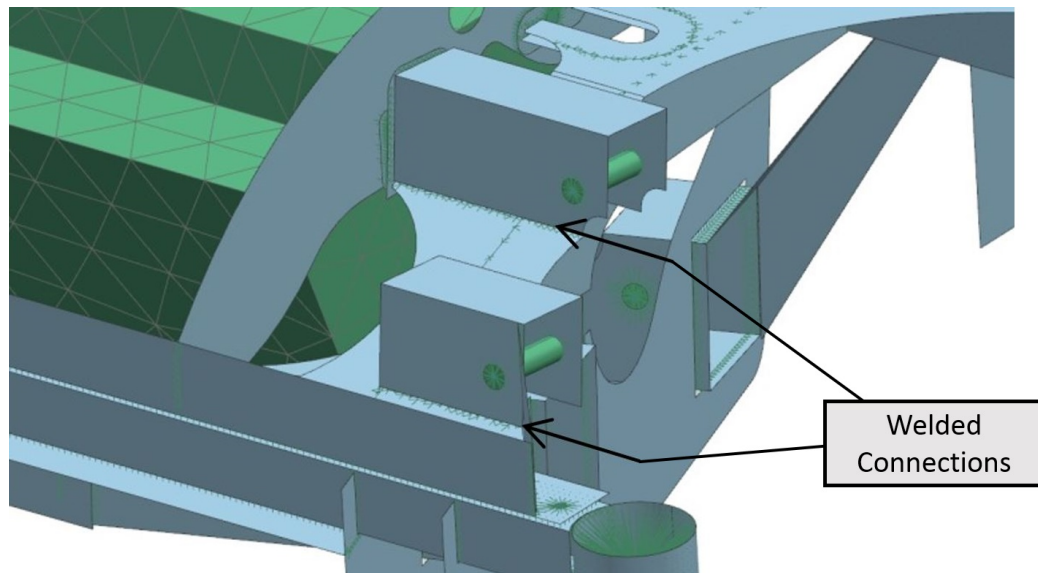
Front-Left view of the FEA assembly with 1-D welded connections implemented.
